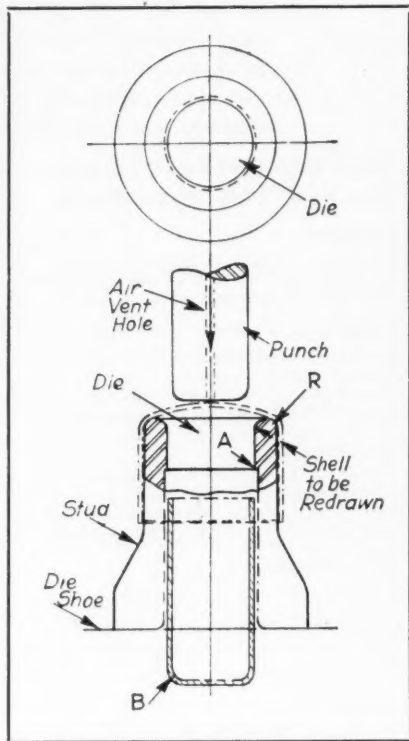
Non-ferrous sheet metal shells can be redrawn by turning them inside out in a simple redrawing die as shown here.
